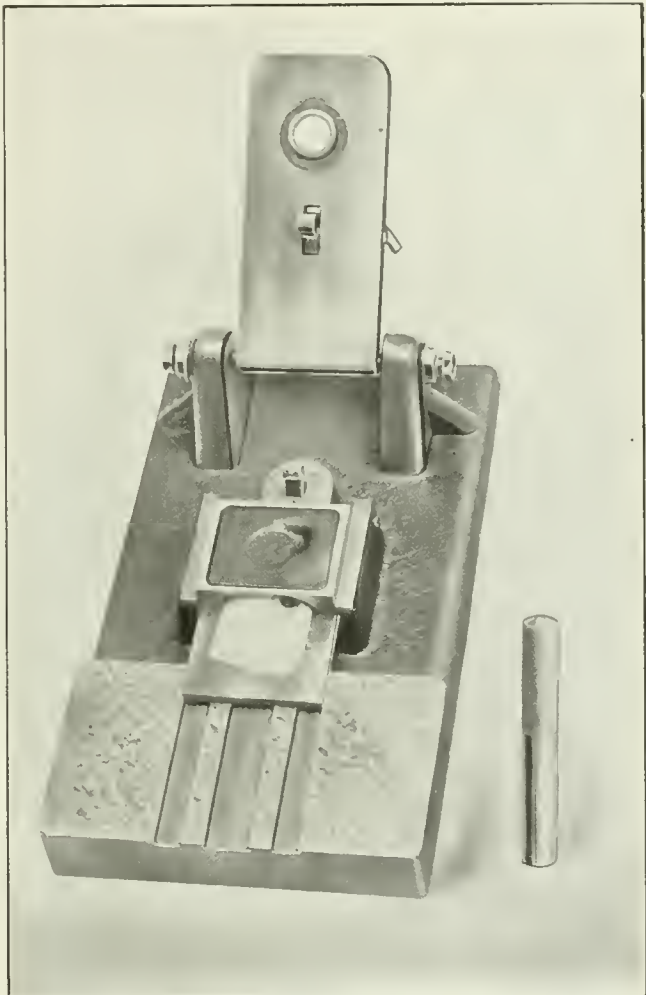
Jig for Molding Wax Formers, with Leaf Turned back showing Eccentric Sprue Cutter, etc.
